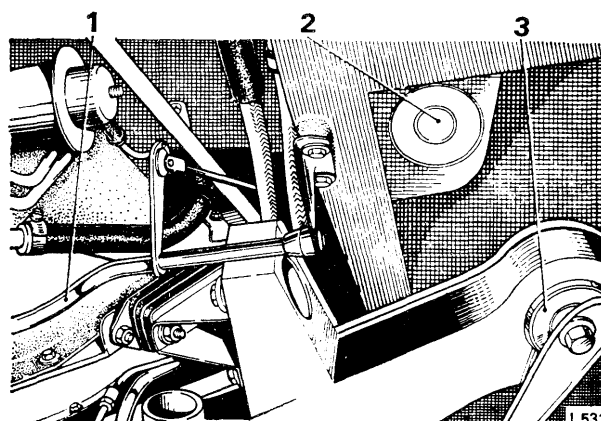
POSITION OF MIXTURE WEAKENING DEVICE FILTER (Early Cars)
